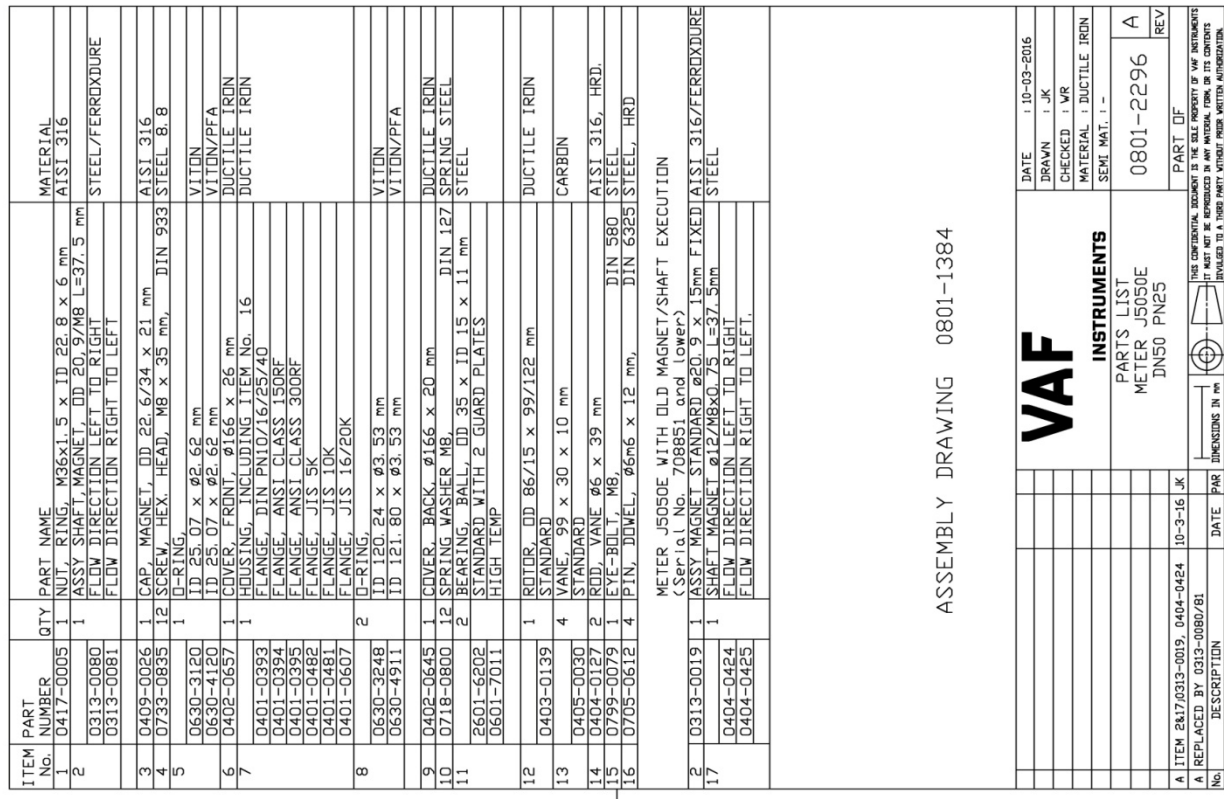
Drawing 0801-2296 – Partslist J5050E DN50 PN25
